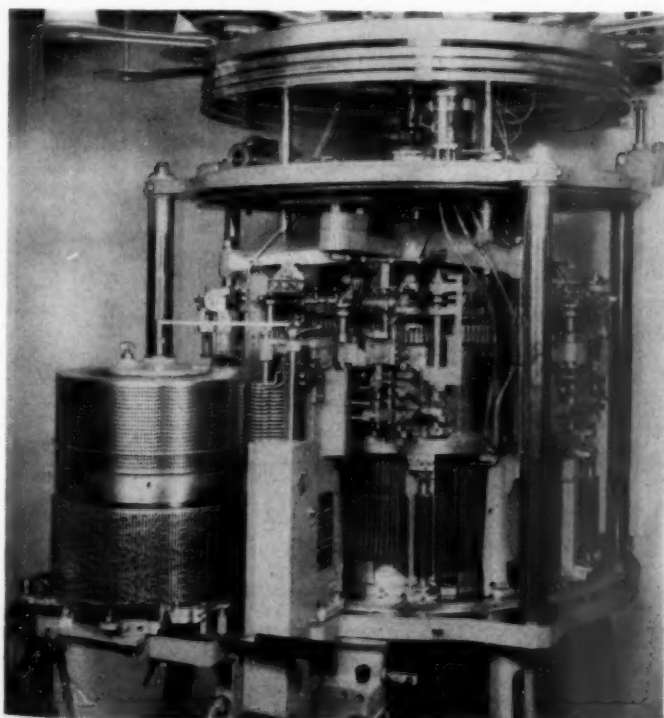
Close-up of head of Model 553 machine, showing the 37-step jacquard control mechanism.
